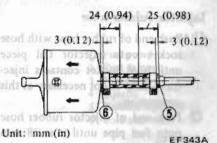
Fuel Feed Pipe to Fuel Filter Inlet Pipe Rubber Hose
